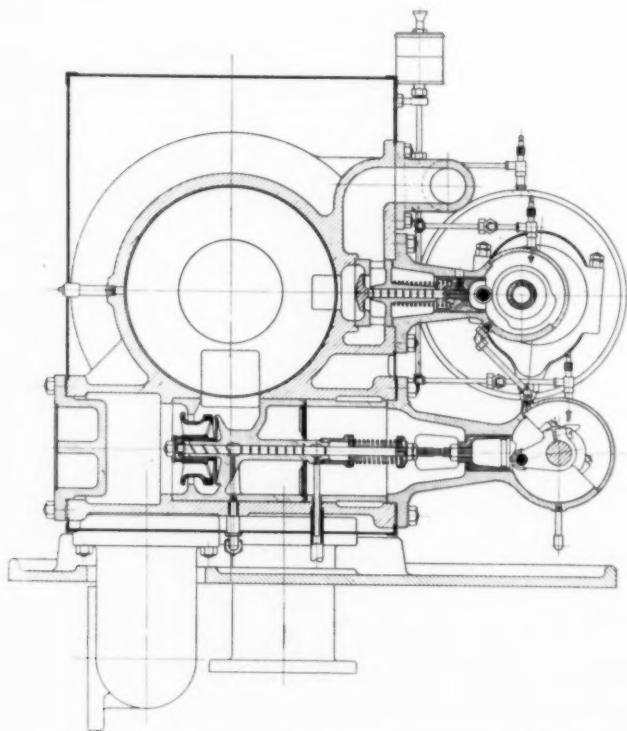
EXHAUST VALVE, AUXILIARY EXHAUST VALVE, AND VALVE GEAR
